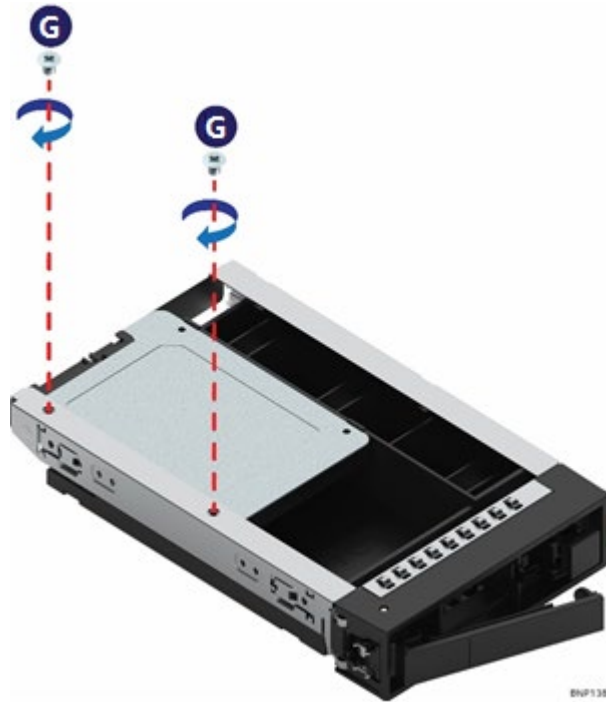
3.5" Drive Carrier to 2.5" SSD Bracket – Secure SSD to Carrier
